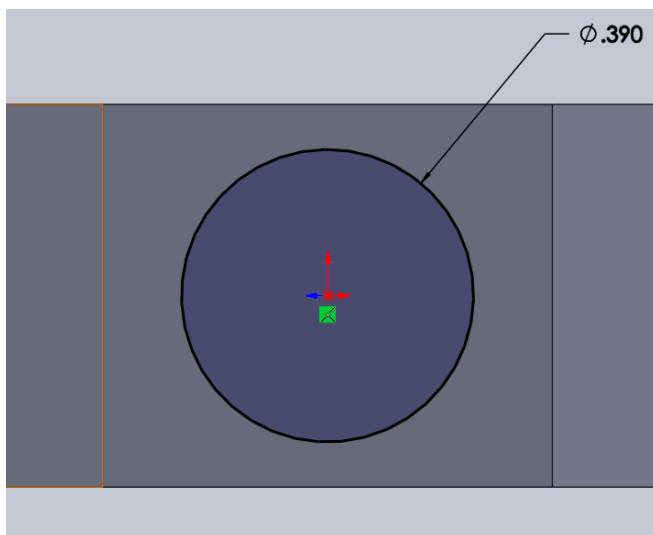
Updated Dimensions of Lever Arm Bearing Recess
